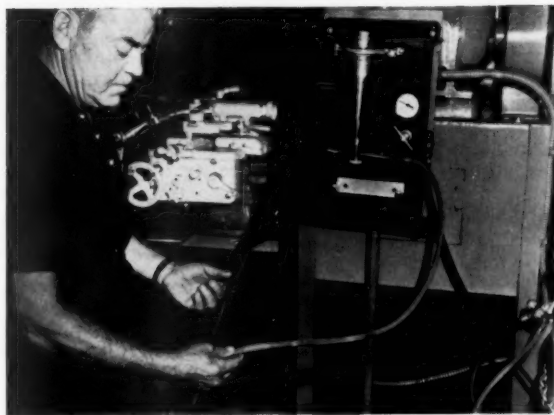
(left).—Grinding the sprayed stem to finished dimensions
